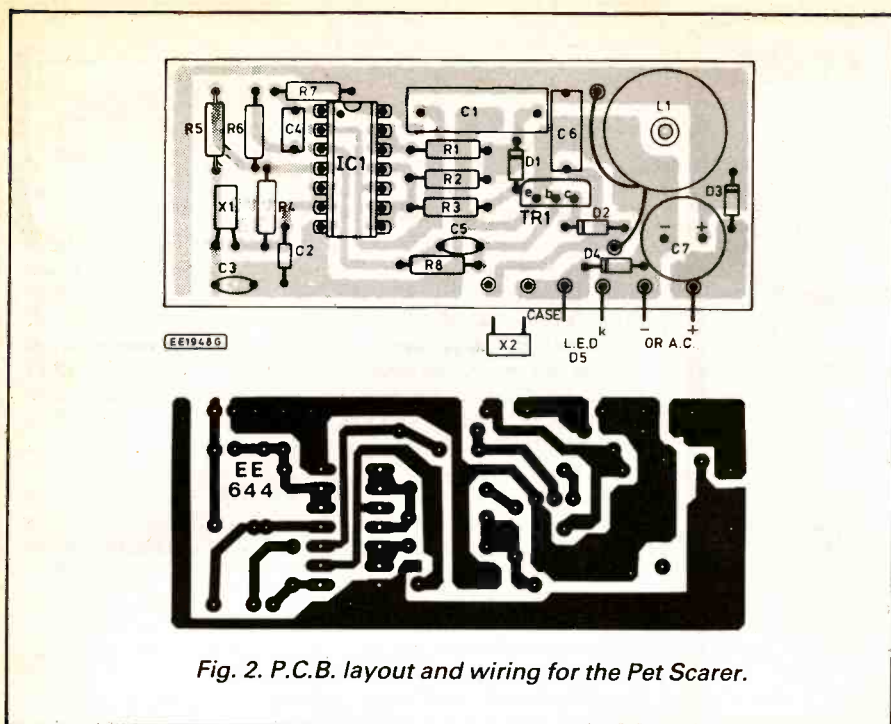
P.C.B. layout and wiring for the Pet Scarer.
